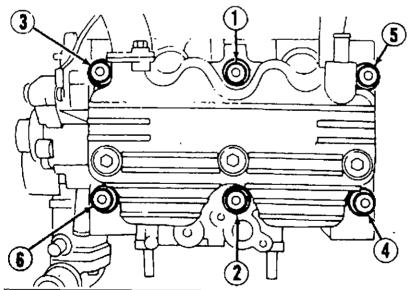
Cylinder Head Bolt Tightening Sequence Courtesy of Subaru of America, Inc.
